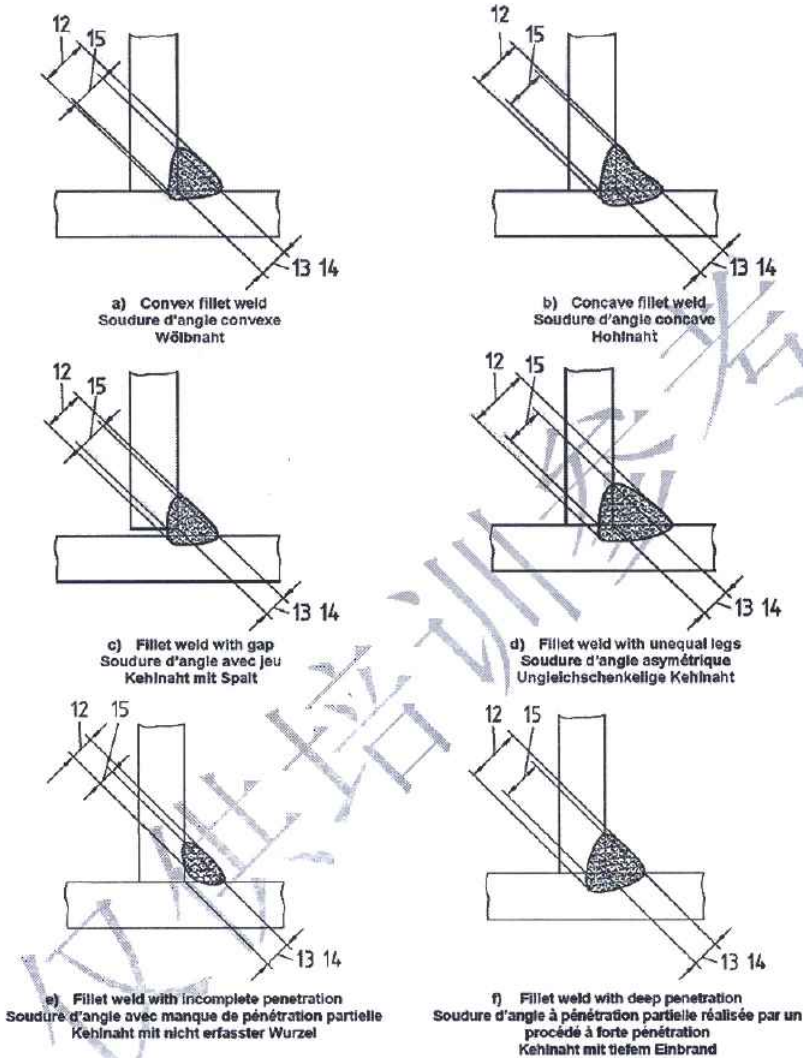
Typical examples of fillet welds with different shapes
